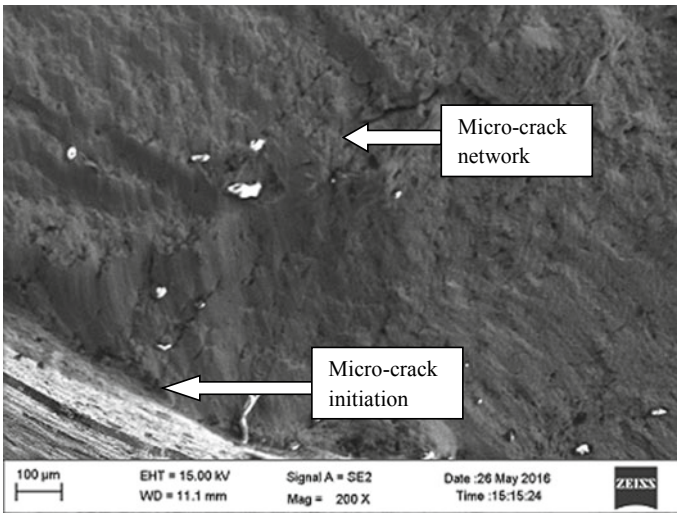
Fractograph of conventionally treated (HT) specimen with microcrack initiated
